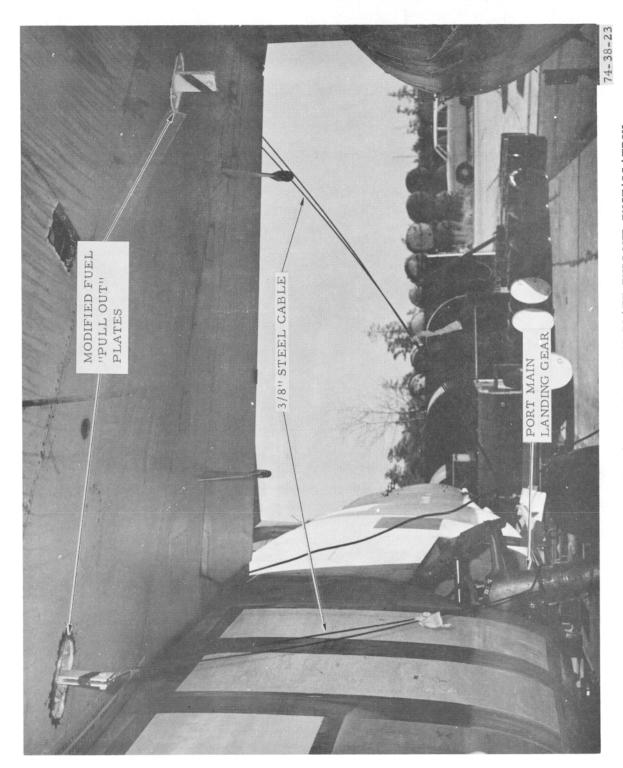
FUEL TANK INSPECTION PLATE PULLOUT INSTALLATION
